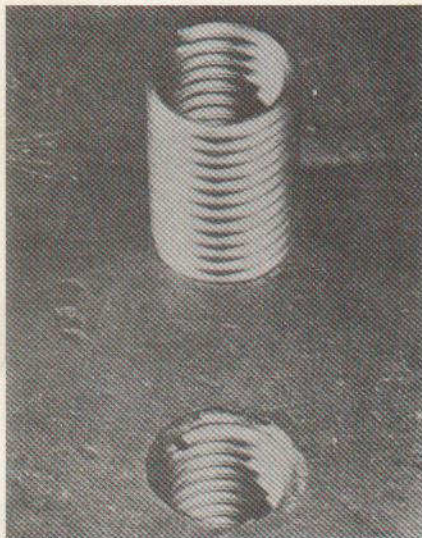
A thread insert and a complete repair are shown above. Special tools are provided in thread repair kit for installation of thread insert.
